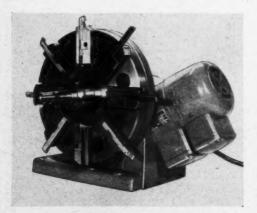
This Beer indexing toolpost for a lathe is fitted with a boring bar and a holder for eight radially-mounted tool-bits
